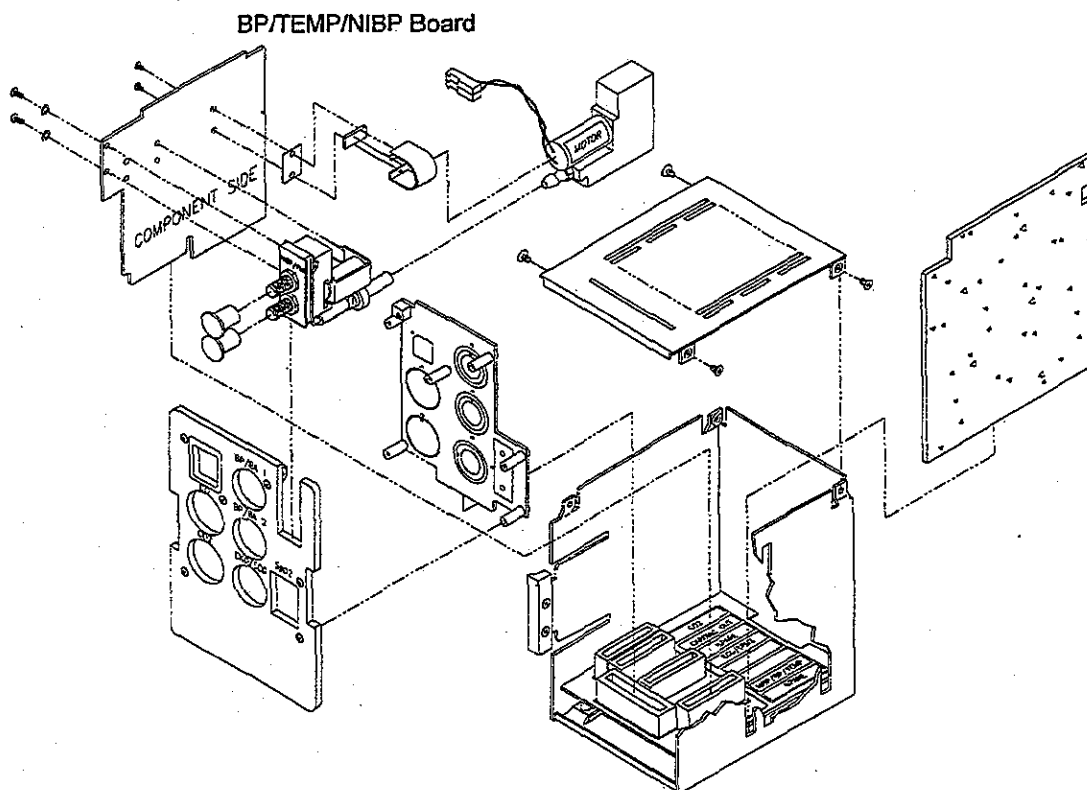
Noninvasive Blood Pressure Option - Exploded View
